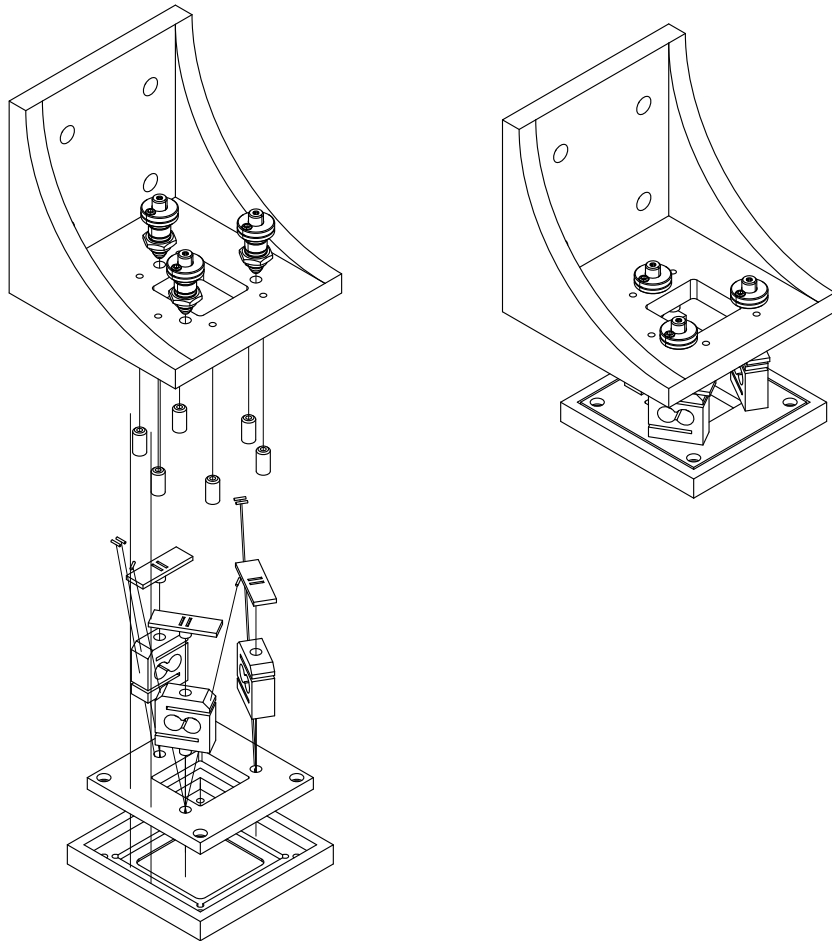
The force-sensing carrier holder on the arm of the printing tool.
